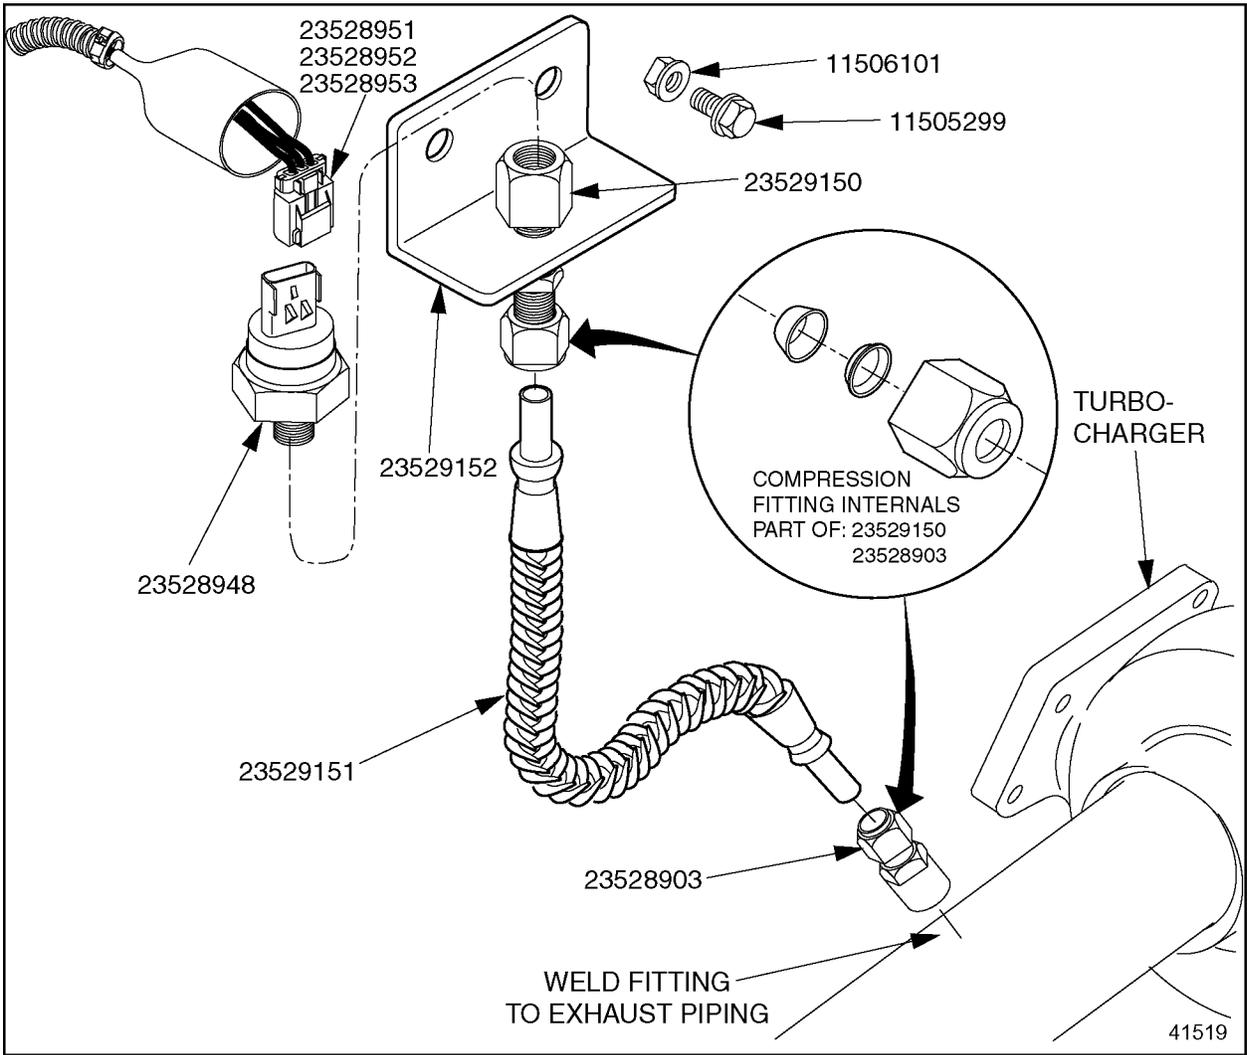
Installation of Exhaust Back Pressure Sensor Kit
